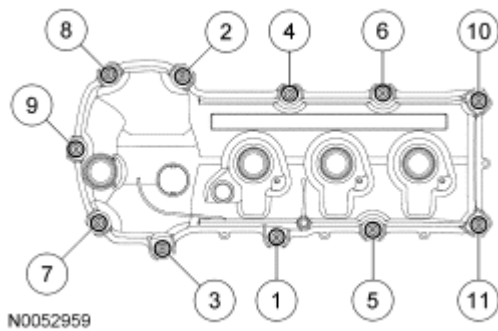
Installing LH Valve Cover Stud Bolts In Sequence
